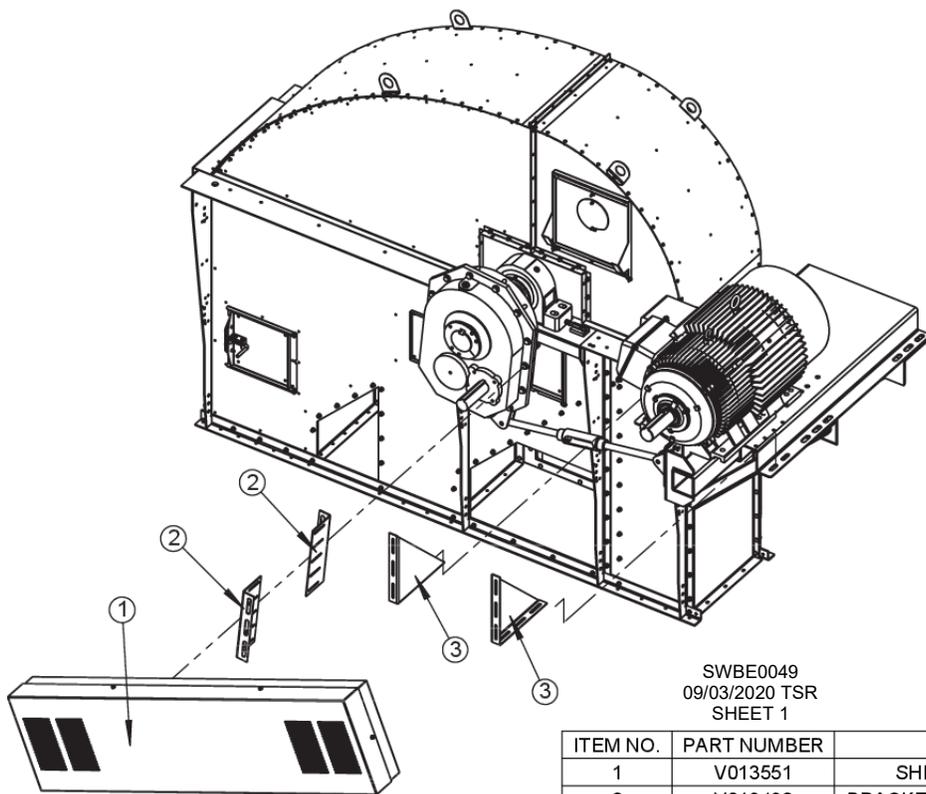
Torque arm bracket on 42" or 48" pulley head drive
